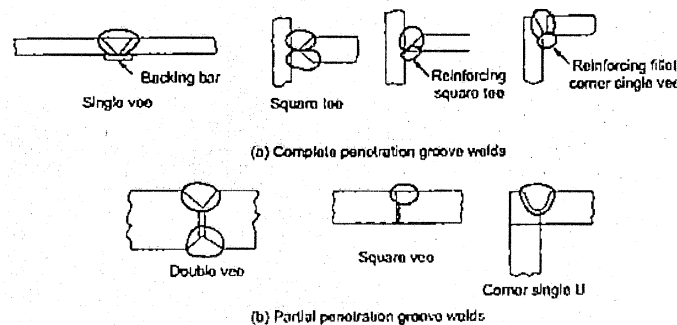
Partial and complete penetration of butt welds
